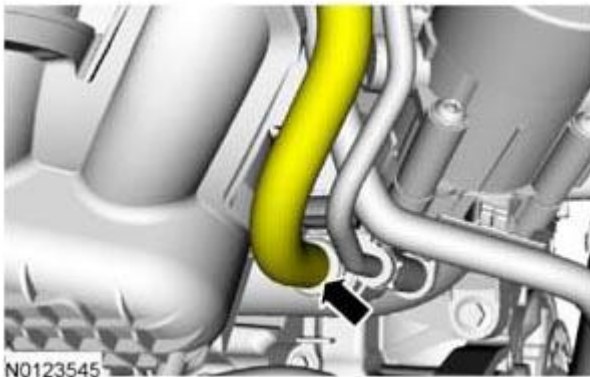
Locating Brake Booster Vacuum Tube To Intake Manifold
